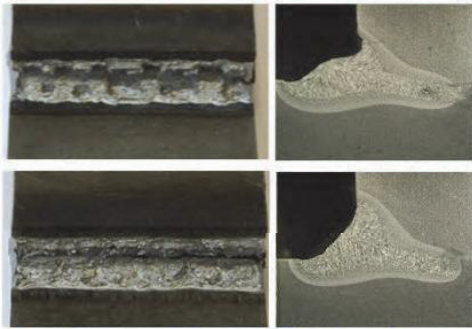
Fracture test results in two HLAW welds with partial penetration in 10 mm plate thickness, view from root side. Up: Laser leading configuration, laser power 8 kW, arc power 2.3 kW, welding speed 0.75 m/min, filler wire speed 7.2 m/min; Down: Arc leading configuration, laser power 9.5 kW, arc power 2.5 kW, welding speed 1 m/min, filler wire speed 6.5 m/min. On the left are the samples after fracture testing.
